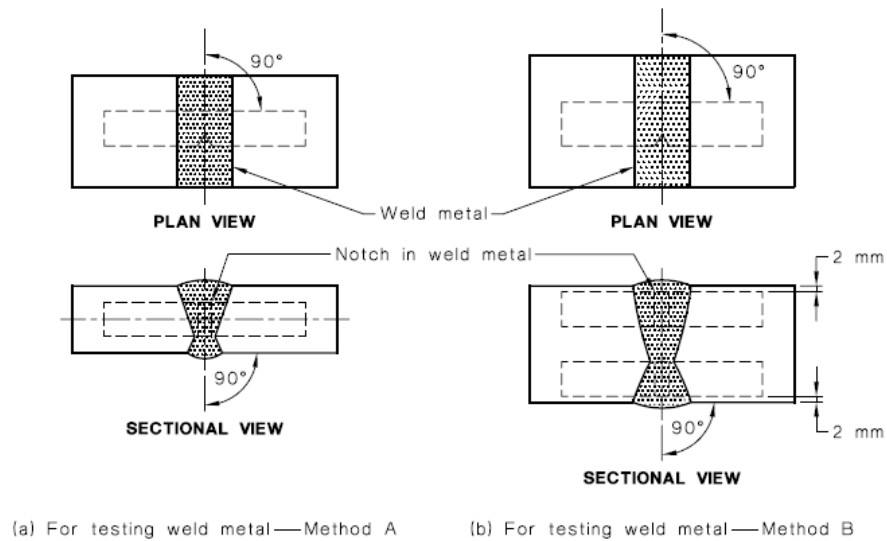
Location of Charpy impact test specimens at HAZ and the weld fusion zone [10].
